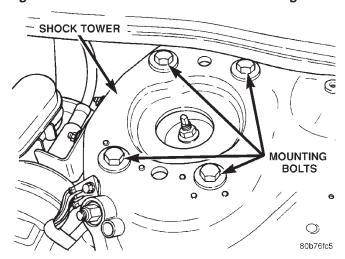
Shock Assembly Attachment To Shock Tower INSTALLATION
